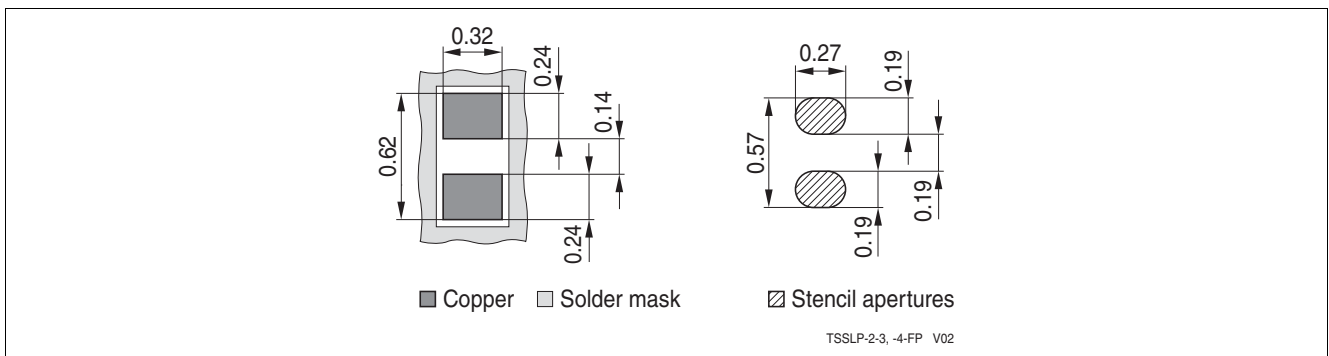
TSSLP-2-4 Footprint (dimension in mm)
